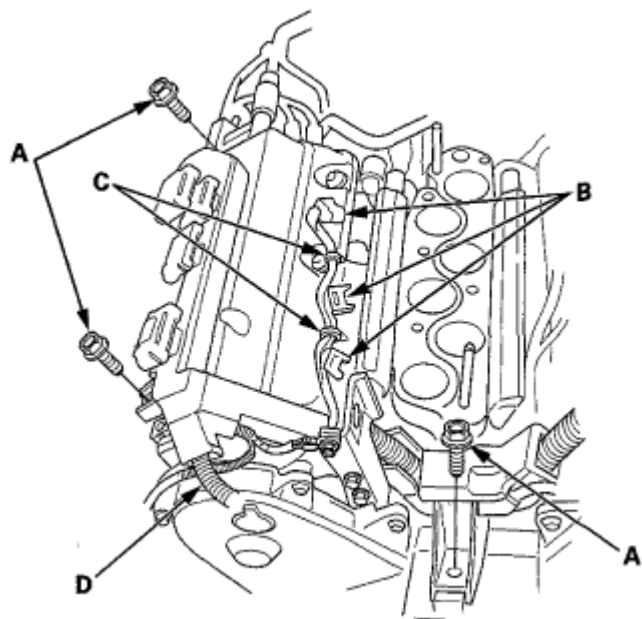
Identifying Injector Connectors, Harness Clamps, Harness And Harness Holder Mounting Bolts
